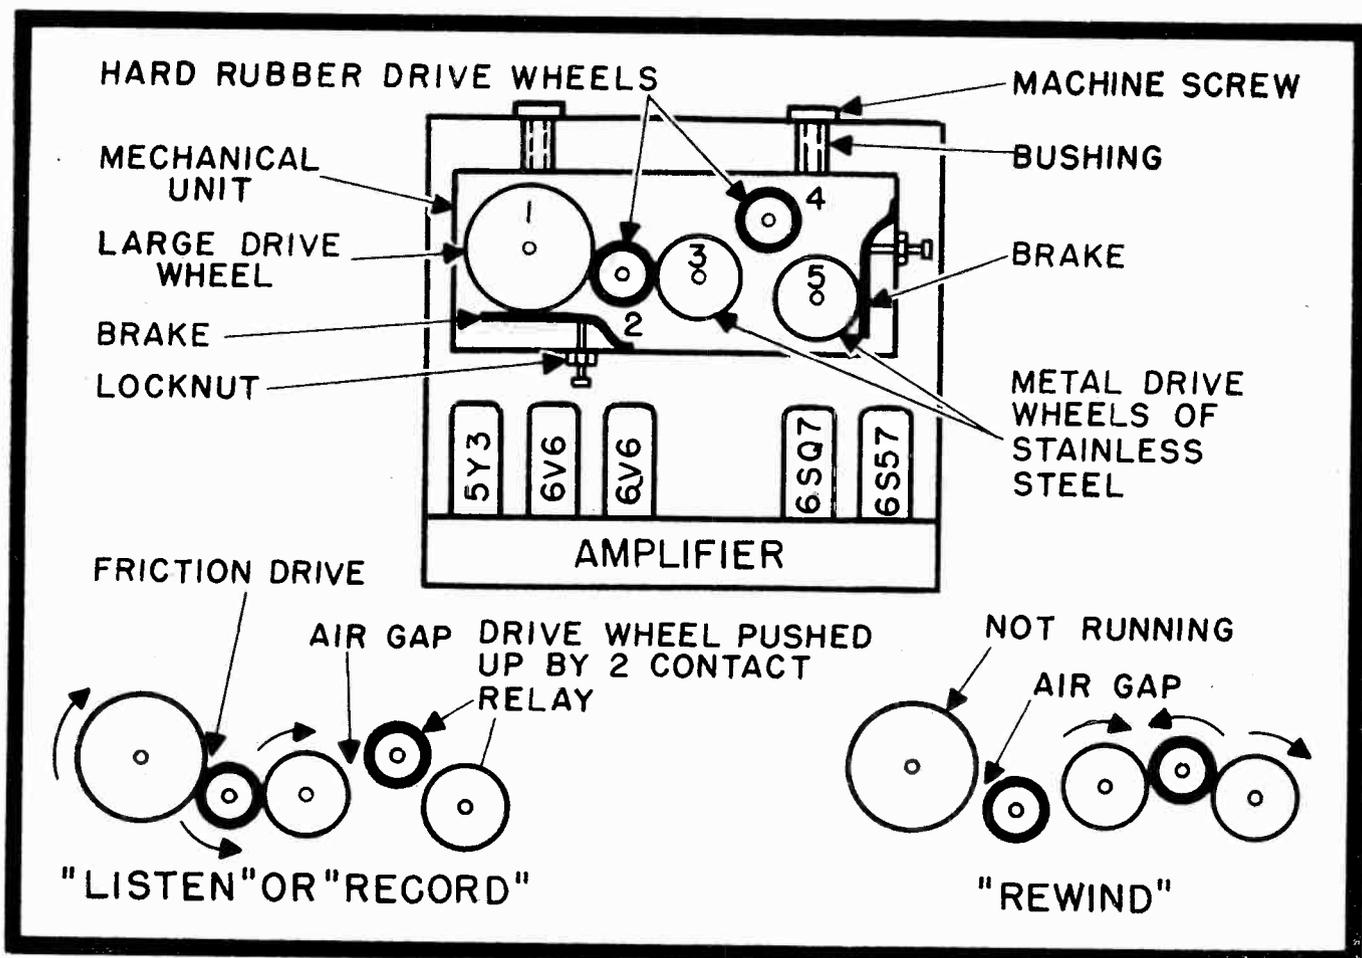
Magnetic Wire Recorder and Reproducer, Rear View, Instrument Cover removed.
